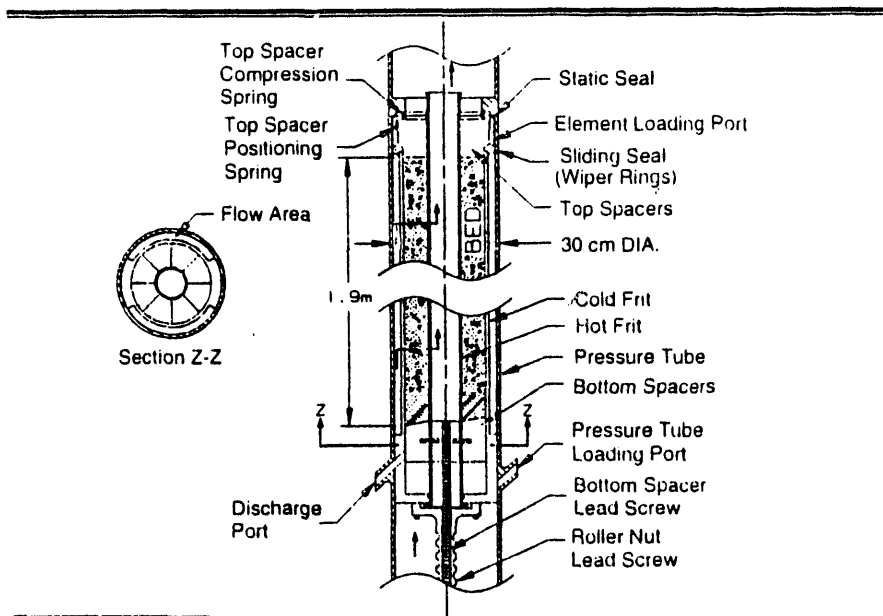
Fuel element geometry for cooling ADAPT fuel beads.
